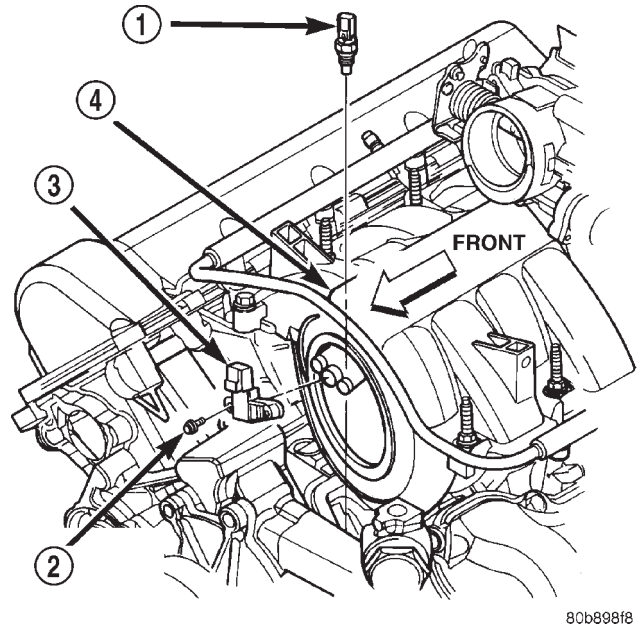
MAP Sensor L-Shaped Rubber Fitting—3.9/5.2/5.9L Engines
